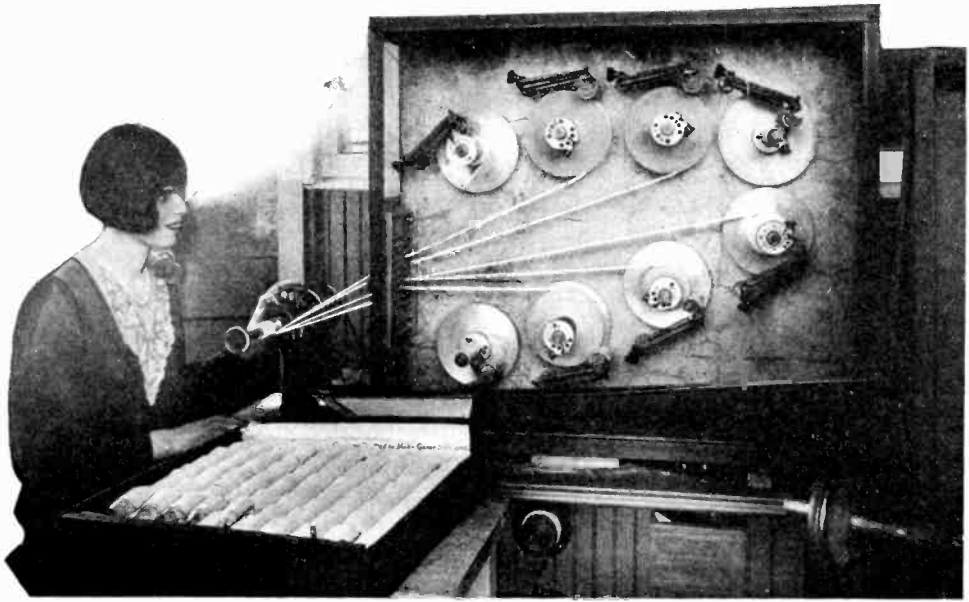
Side view of a condenser winding machine. Notice how the sheets of paper and metal foil feed through the end of the case onto the winding spindle.
